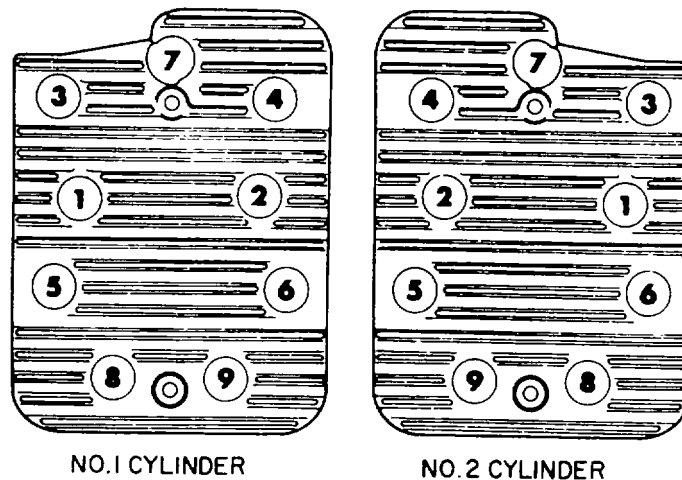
Cylinder Head Bolt Tightening Sequence
